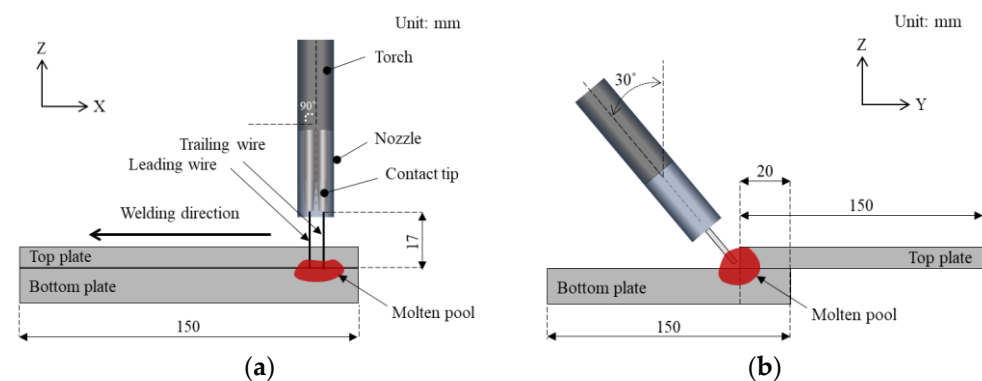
Schematic diagram of the lap fillet joint shape, travel angle, and work angle for tandem gas metal arc welding: (a) X-Z plane; (b) Y-Z plane.
